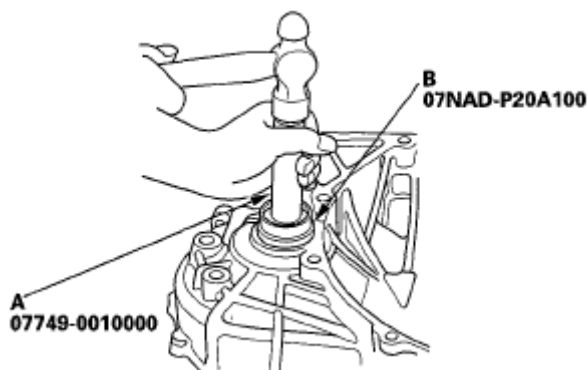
Identifying Driver And Oil Seal Driver Attachment Courtesy of AMERICAN HONDA MOTOR CO., INC.
